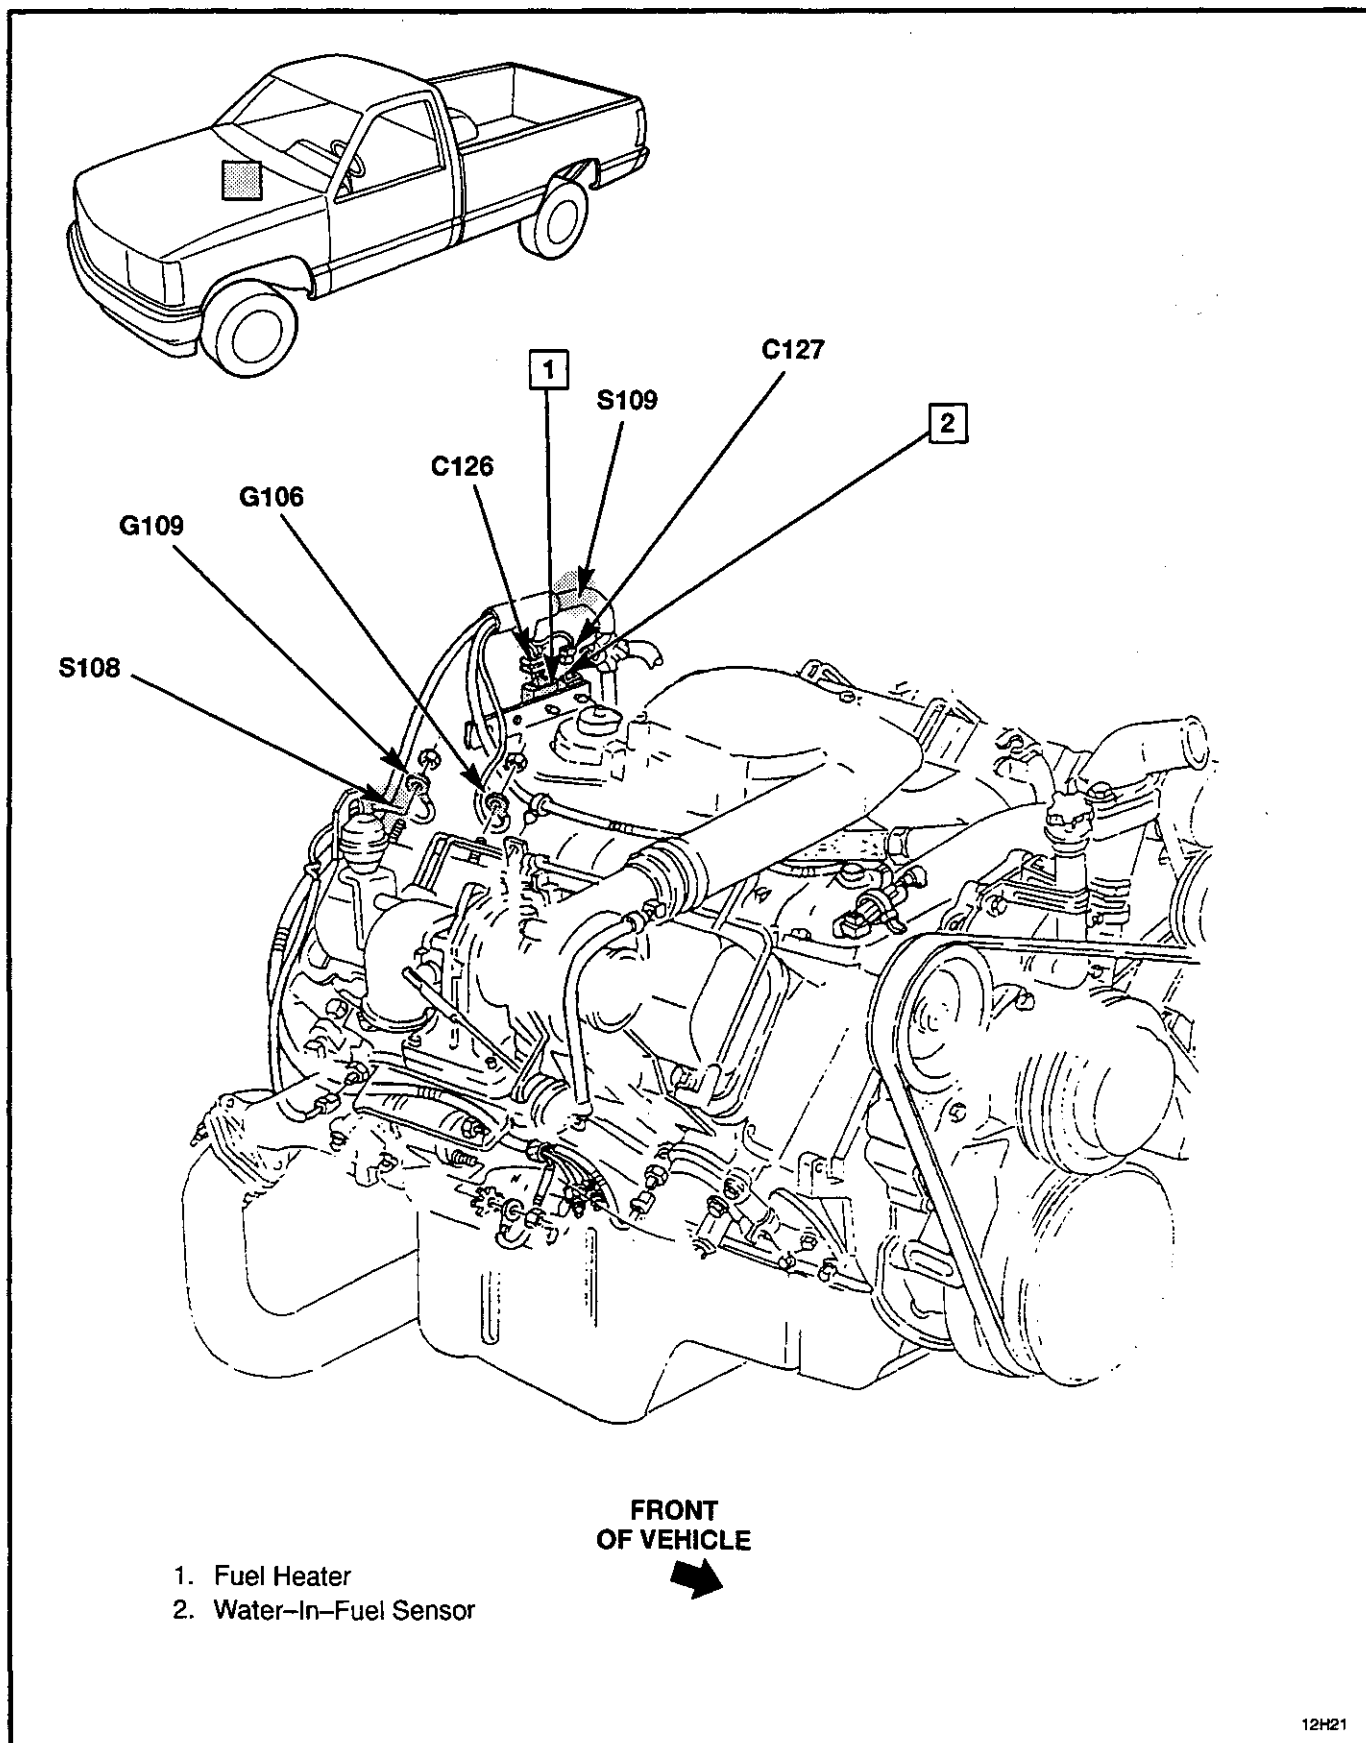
Turbo Diesel Engine Wiring, RH Side
